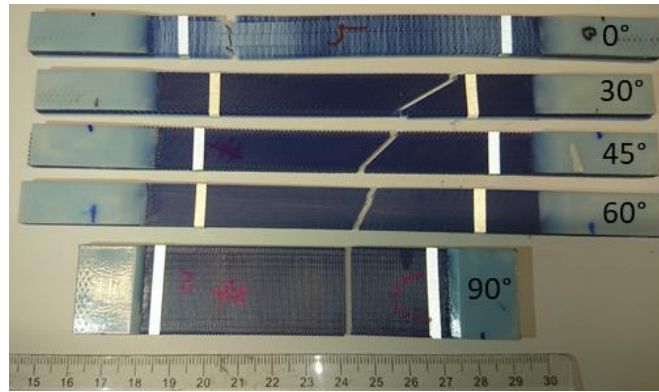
Fracture lines of ABS printed parts subjected to uniaxial tensile loads.
